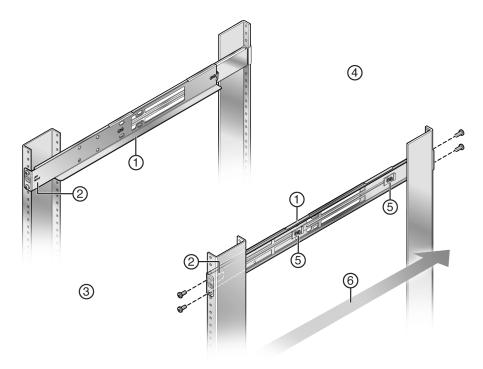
Installing the Rack Mount Rail with Extension Assemblies
